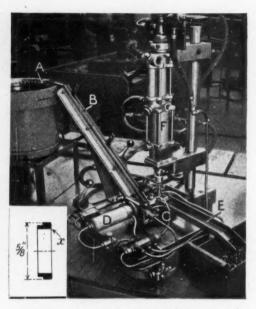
Automatic De-burring Machine Incorporating a Maxam Air-driven Spindle Unit
